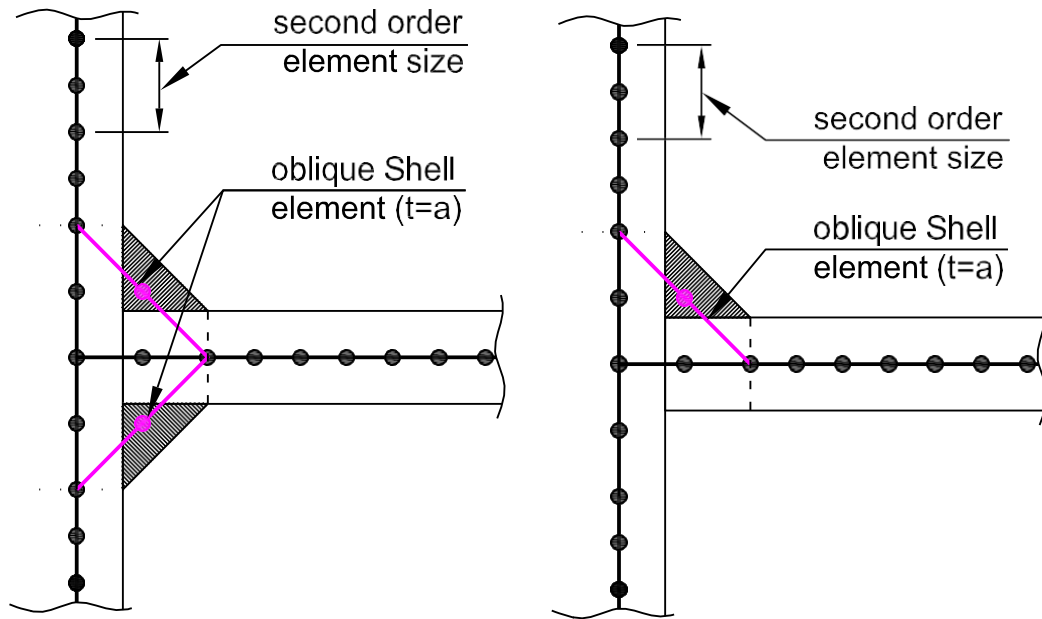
Weld modelling using oblique shell elements [5].
